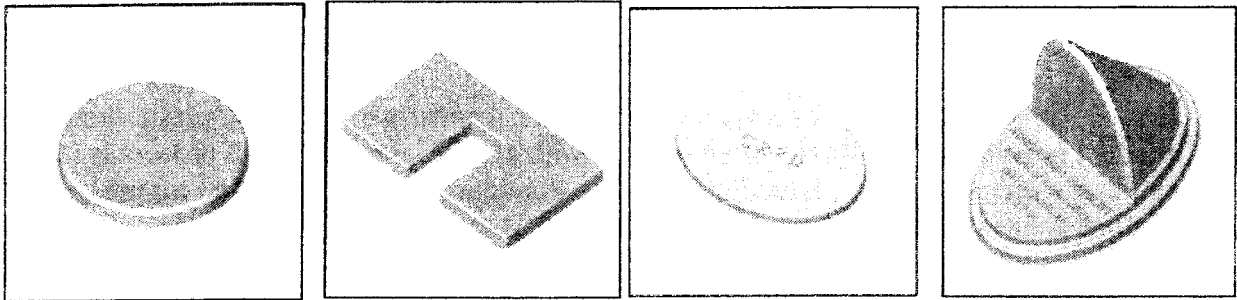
3D design of cylinder, U shape and ellipse test pieces and Millennium Bridge.
